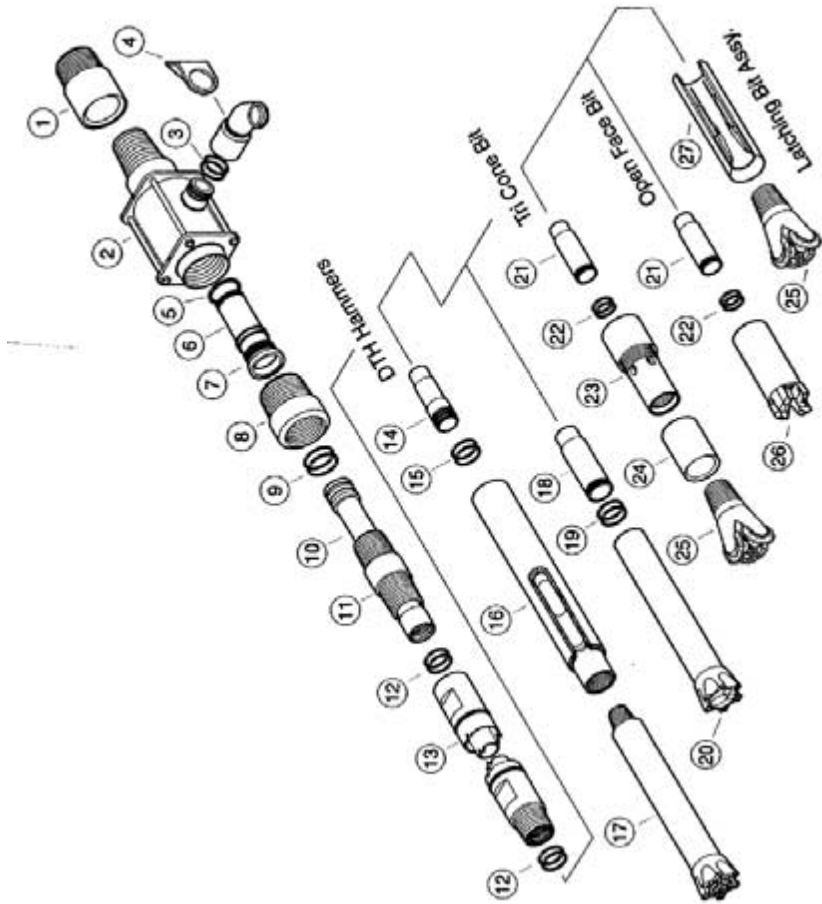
Dual wall pipe drill string schematic showing three drill bit string options and two downhole air hammer string options. Nomenclature of above; 1) adapter sub, 2) air swivel, 3) O-ring, 4) air swivel inlet, 5) O-rings, 6) shaft adapter, 7) O-rings, 8) saver sub adapter, 9) O-rings, 10) center tube, 11) saver sub, 12) O-rings, 13) dual wall drill pipe, 14) interchange connector tube, 15) O-rings, 16) interchange sub, 17) standard down-the-hole (DTH) air hammer, 18) connector tube for reverse circulation downhole air hammer, 19) O-rings, 20) reverse circulation downhole air hammer, 21) O-rings, 22) bit connector sleeve, 23) rock bit sub, 24) wear sleeve, 25) tri-cone bit, 26) open face drag bit for coring and, 27) latching bit sub (courtesy of Foremost Industries Incorporated).
